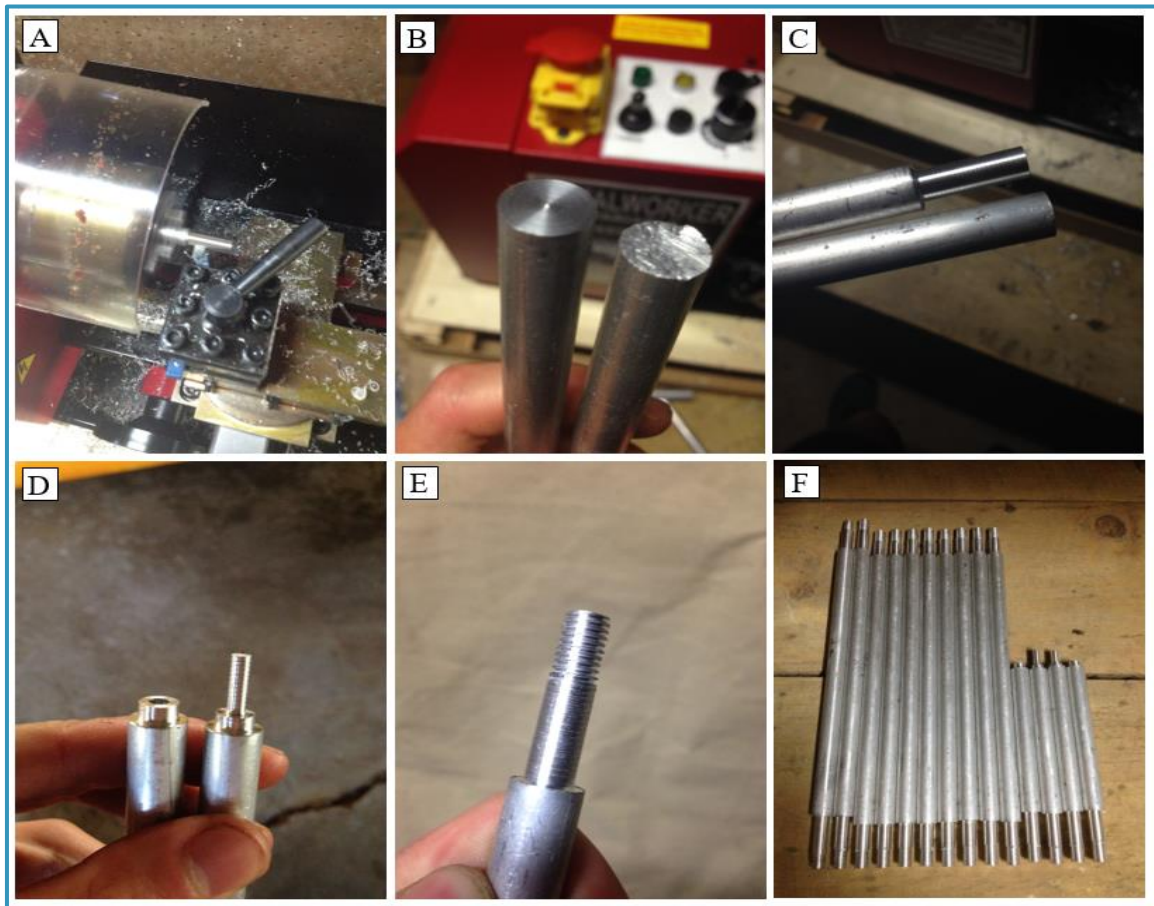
A) Reducing axle end thickness on lathe, B) Comparison of faced edge, C) Lathed axle end, D) Drive axle centre join structure, E) Threaded axle end, F) All completed axles
